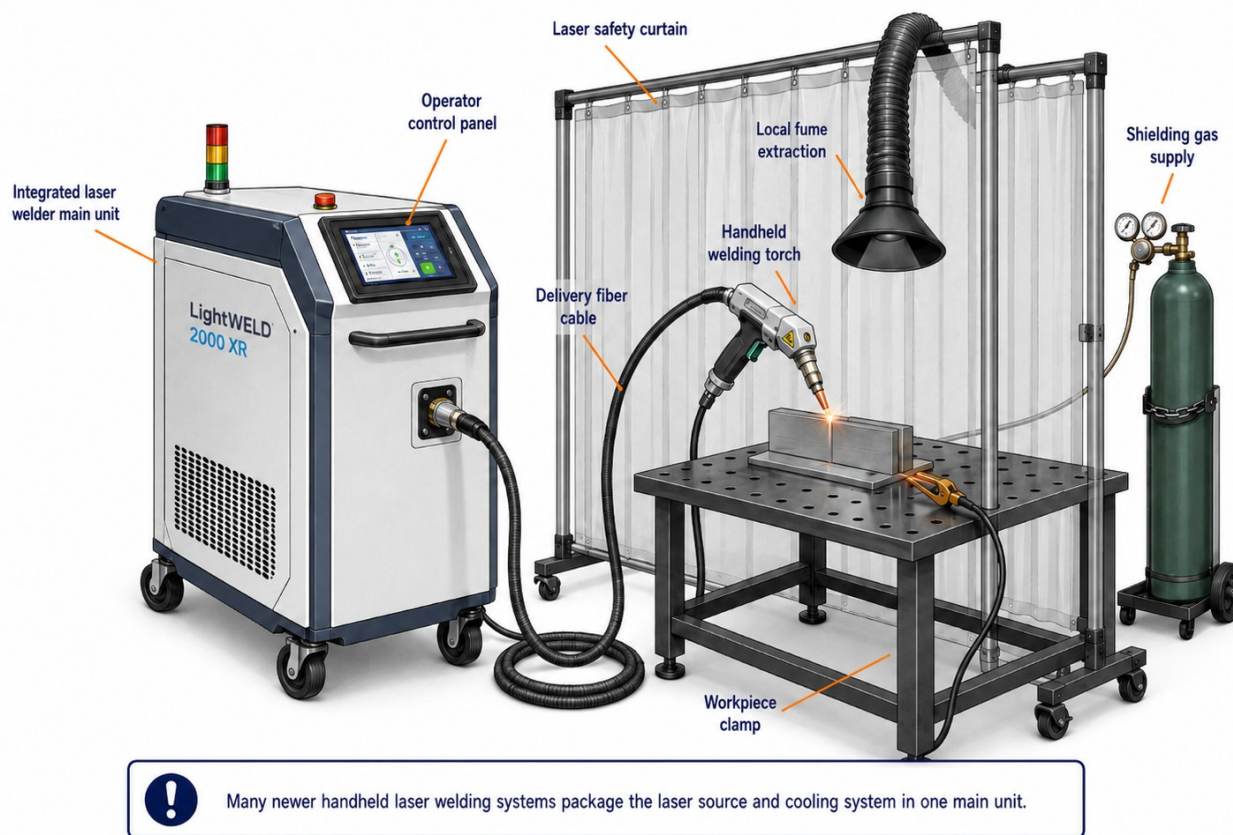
Major components of a modern integrated handheld laser welding system, illustrated with an IPG Photonics LightWELD 2000 XR. The light-gray curtain represents a laser-rated barrier selected for the specific installation.
